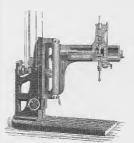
SELF-ACTING RADIAL DRILLING MACHINE.
